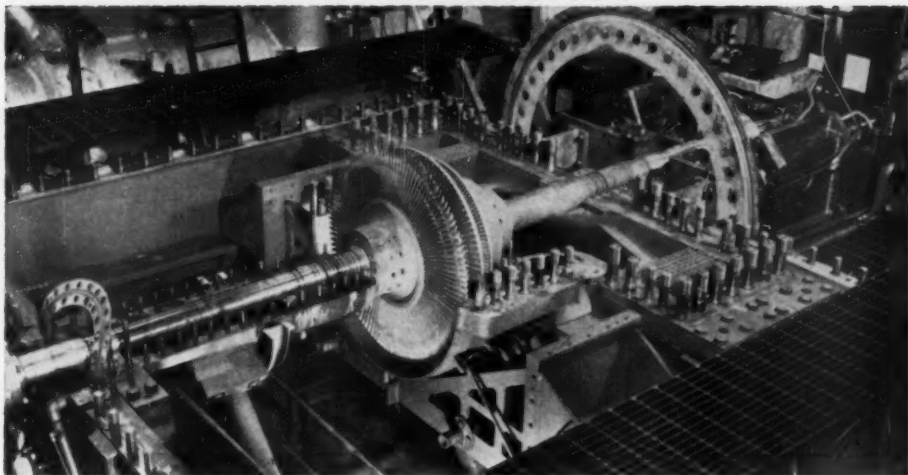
The base section of the test facility during assembly, with the spindle in place. The turbine output is absorbed by a 3000-hp, 10,000-rpm disk-type water brake.
